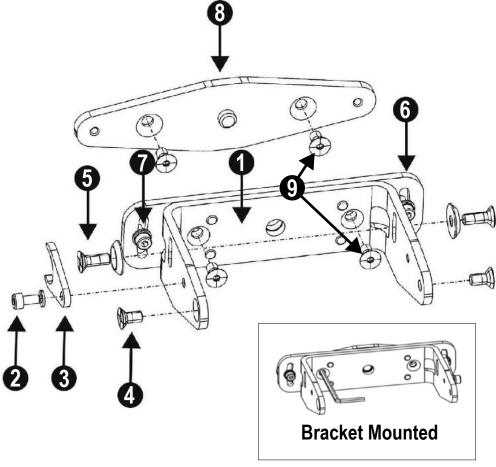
Pitch and roll angle adjustment bracket (SXA-MBK-1)
